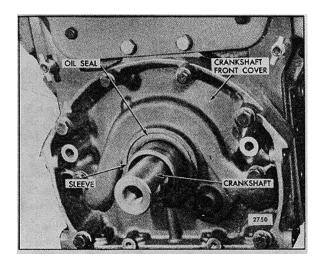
Typical Crankshaft Front Oil Seal Mounting
